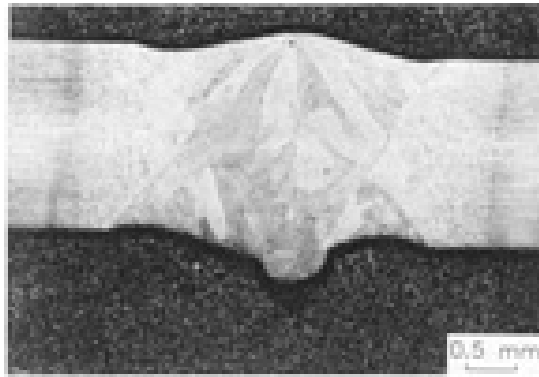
MICROGRAPH OF TRANSVERSE SECTION OF AN ELECTRON-BEAM WELDED BUTT WELD JOINING 2.5 MM (0.100 IN.) THICK TI-6AL-4V SHEET USING A 0.127 MM (0.005 IN.) THICK TANTALUM SHIM PLACED IN THE JOINT. KROLL'S REAGENT WAS USED AS ETCHANT.
